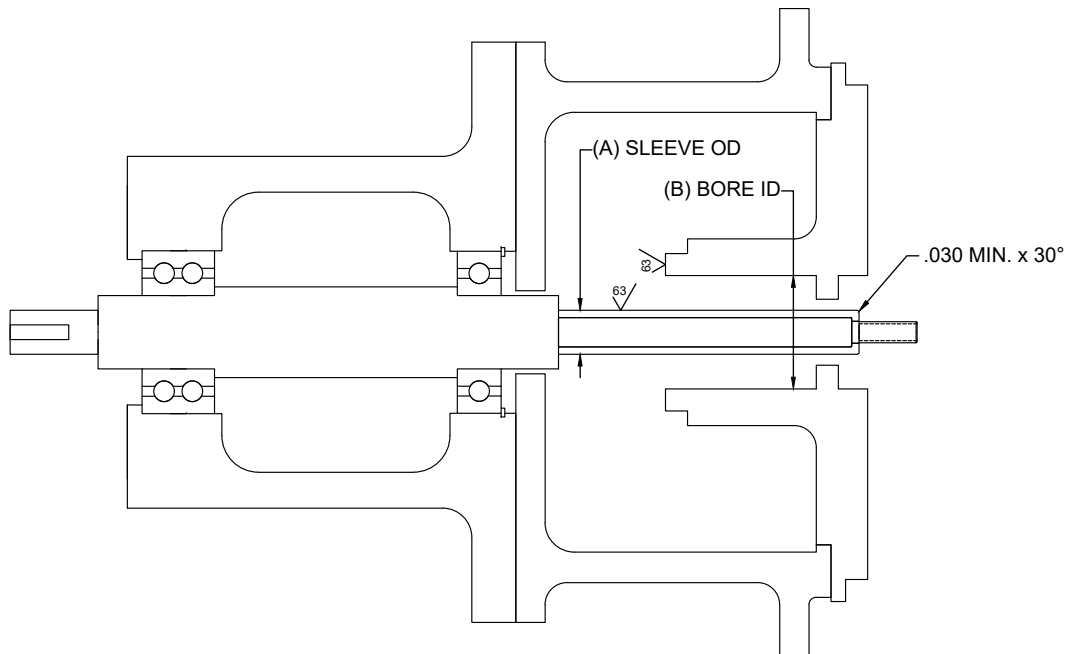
Surface finish and chamfer locations. Fully assembled pump without seal.
